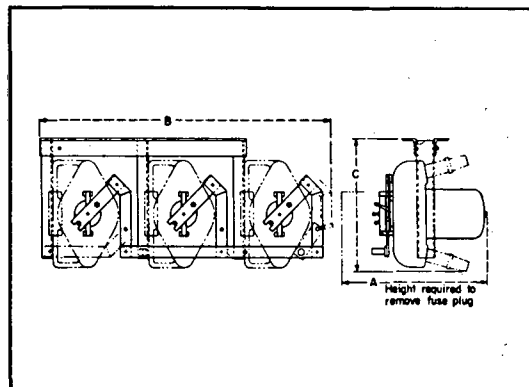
Short way mounted rack for assembly for sealed oil cutouts
